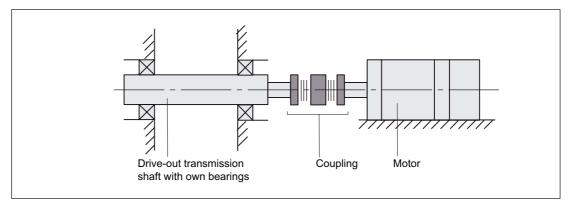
Mechanical output transmission shaft with its own bearings and compensating coupling
